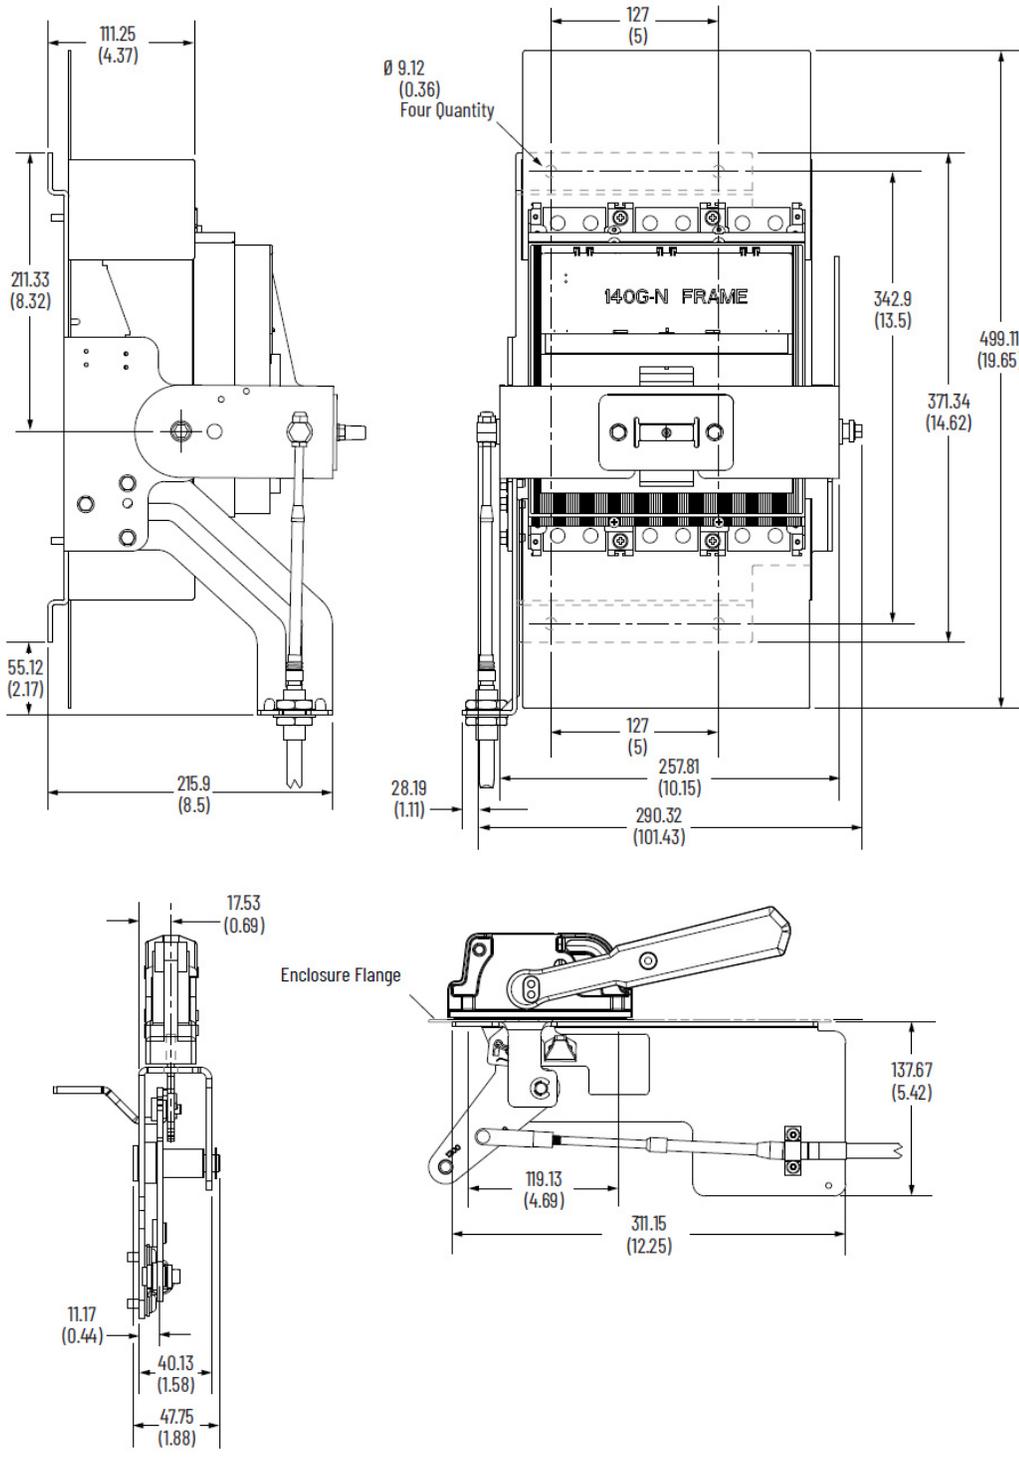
Enclosure with Handle Cutout: 1494V Variable Depth, Flange-operated Circuit Breaker Operating Mechanism
